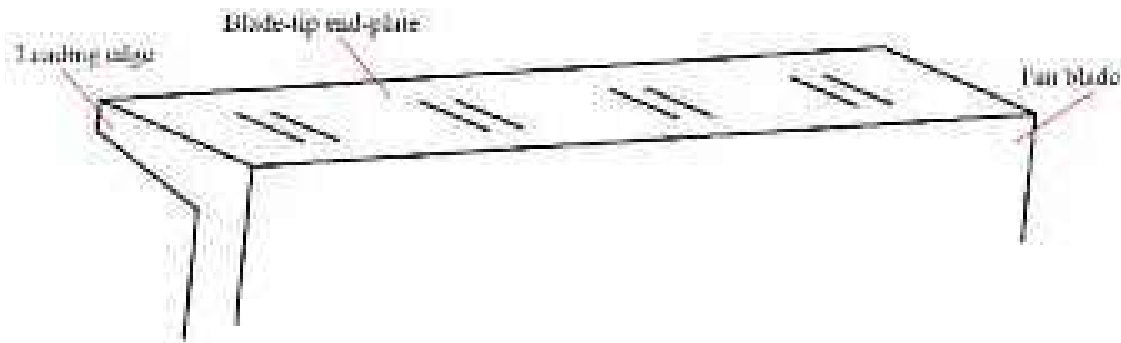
A further embodiment of the blade-tip end-plate in which the end-plate outer surface has many spaced recesses or grooves which may or may not extend through to the leading edge or the outer surface's trailing edge.
